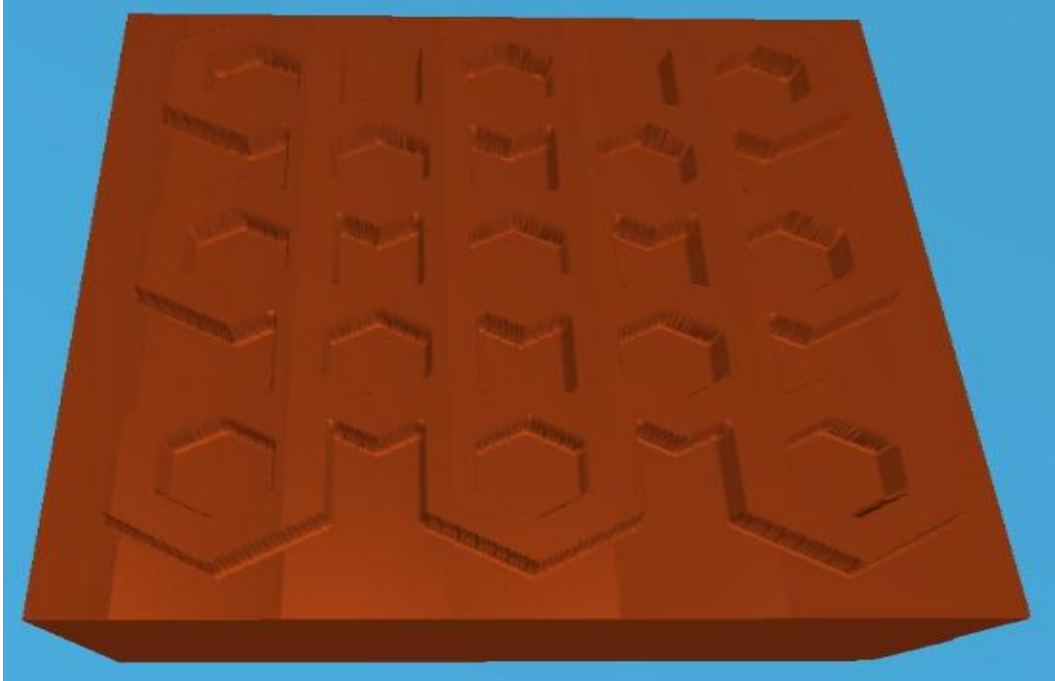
Pencil Cutting Tool Path for HEX modal
